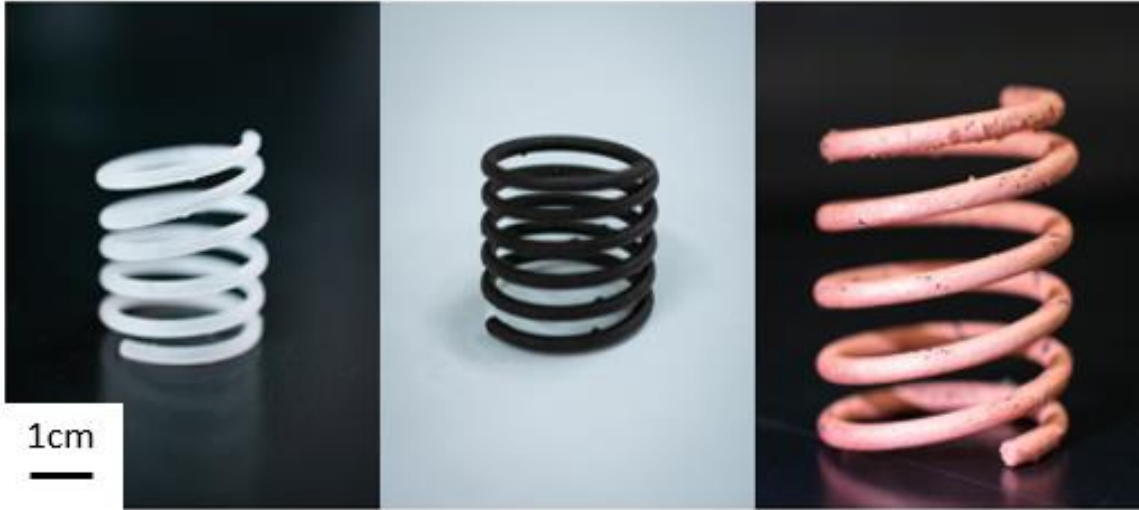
3D printed parts used in the work for investigating the copper electroplating process in both selective and complete methods. The as-printed shape memory polymer (left), the conductive coating applied only to a spiral pattern on the part (middle), and the copper traces after electroplating the ink (right).
